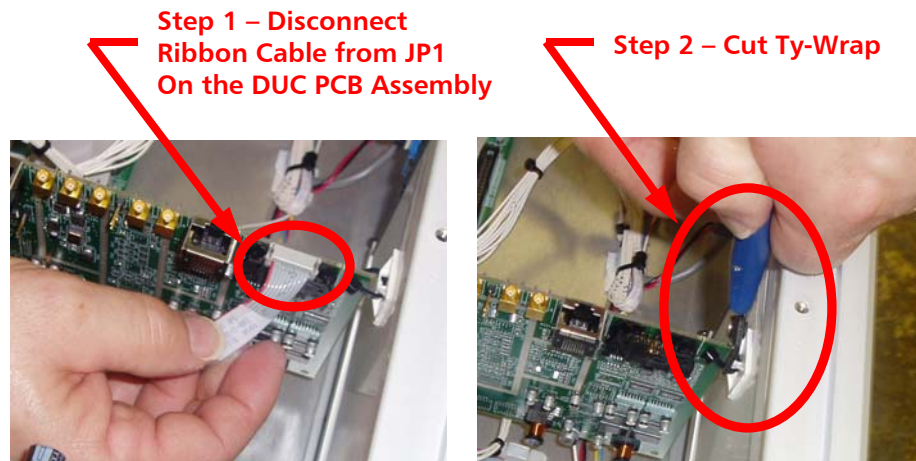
Disconnect Ribbon Cable and Cut Ty-Wrap From DUC PCB Assembly
